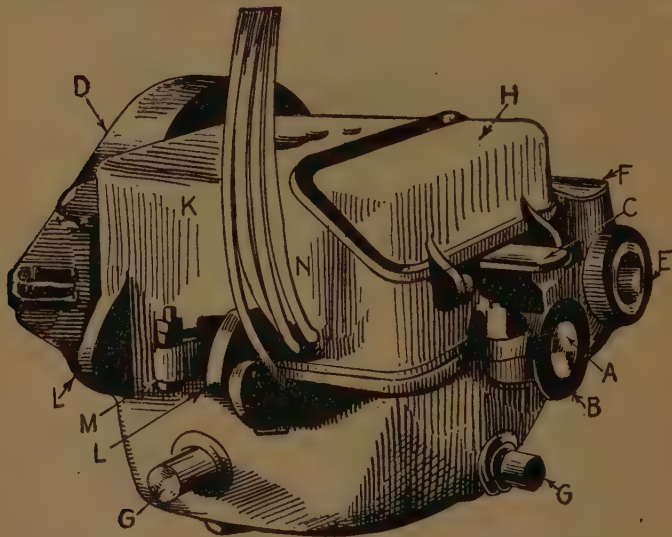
,514.—Direct current railway motor, casing closed: as shown, the armature shaft A, projects through its bearing B, lubricated by the grease box C, and is connected with the car axle by gear wheels enclosed in the gear cover D. The gears serve to reduce the speed of the car, and also to increase the effective pull of the motor. The car axle passes through the bearing E, lubricated by the grease box F. The motor is supported on the truck by the lugs G G. The commutator door H gives access to the brushes, while a more complete inspection of the working parts may be obtained by throwing back the upper half of the casing K upon the hinges L L, after unscrewing two bolts, one of which is shown at M. The insulated cables shown at N, pass through the casing and supply current to the motor.
